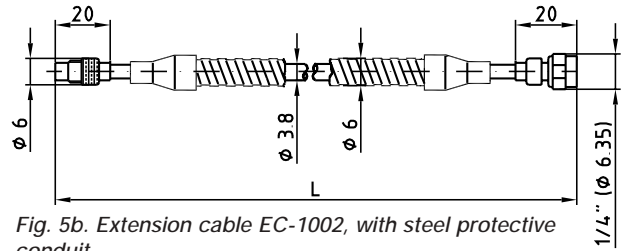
Extension cable EC-1002, with steel protective conduit
